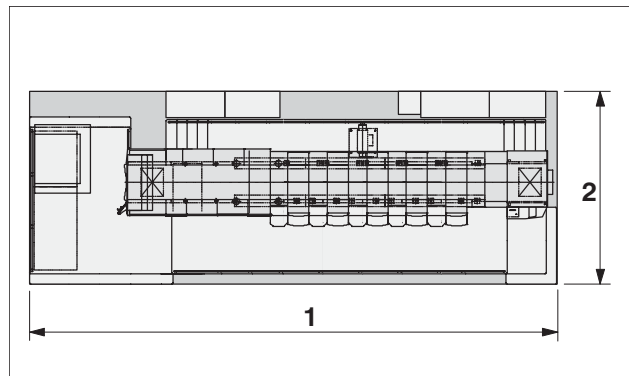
Floor space required by the printing press without DryStar UV in elevated installation
